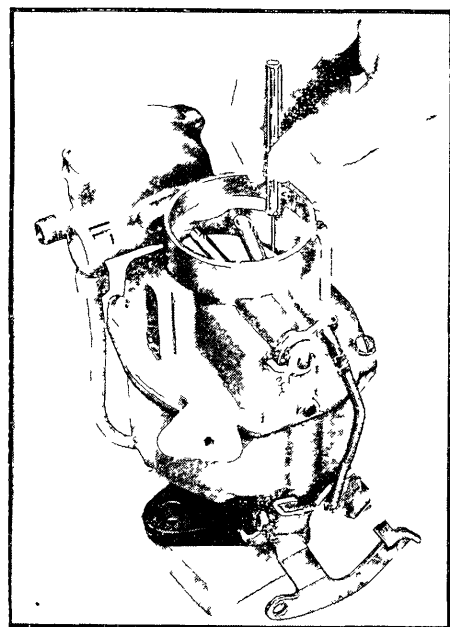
JJ Checking fast idle adjustment on Rochester BC carburetor. 1951-52 Pontiac Six
